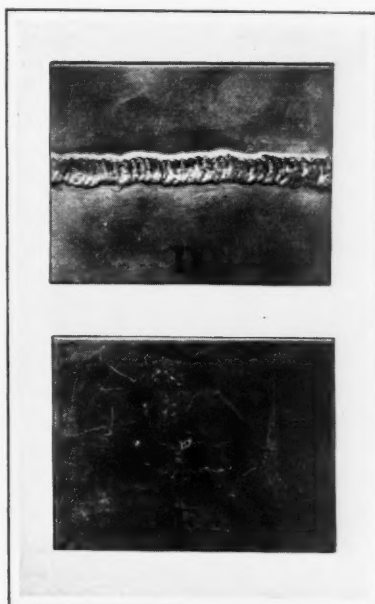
(D) Butt Weld on 16-gage Brass; (E) Flange Weld on 20-gage Brass after Hammering and Polishing
